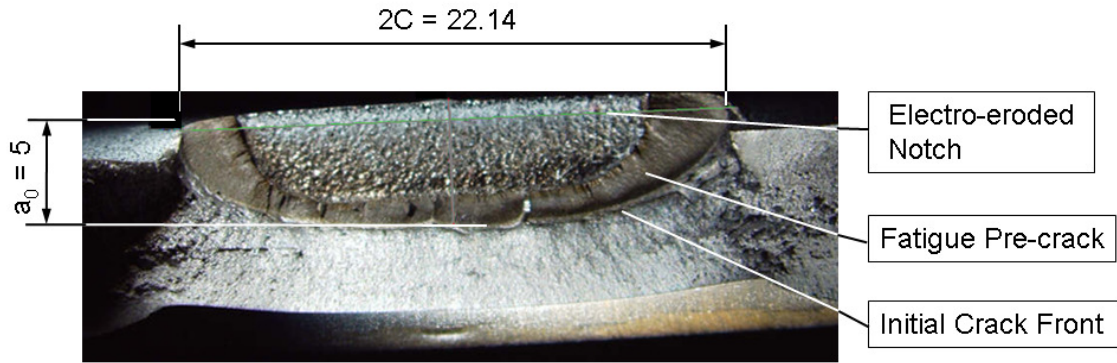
Fracture surface of tensile panel with semi-elliptical surface crack in HAZ.
